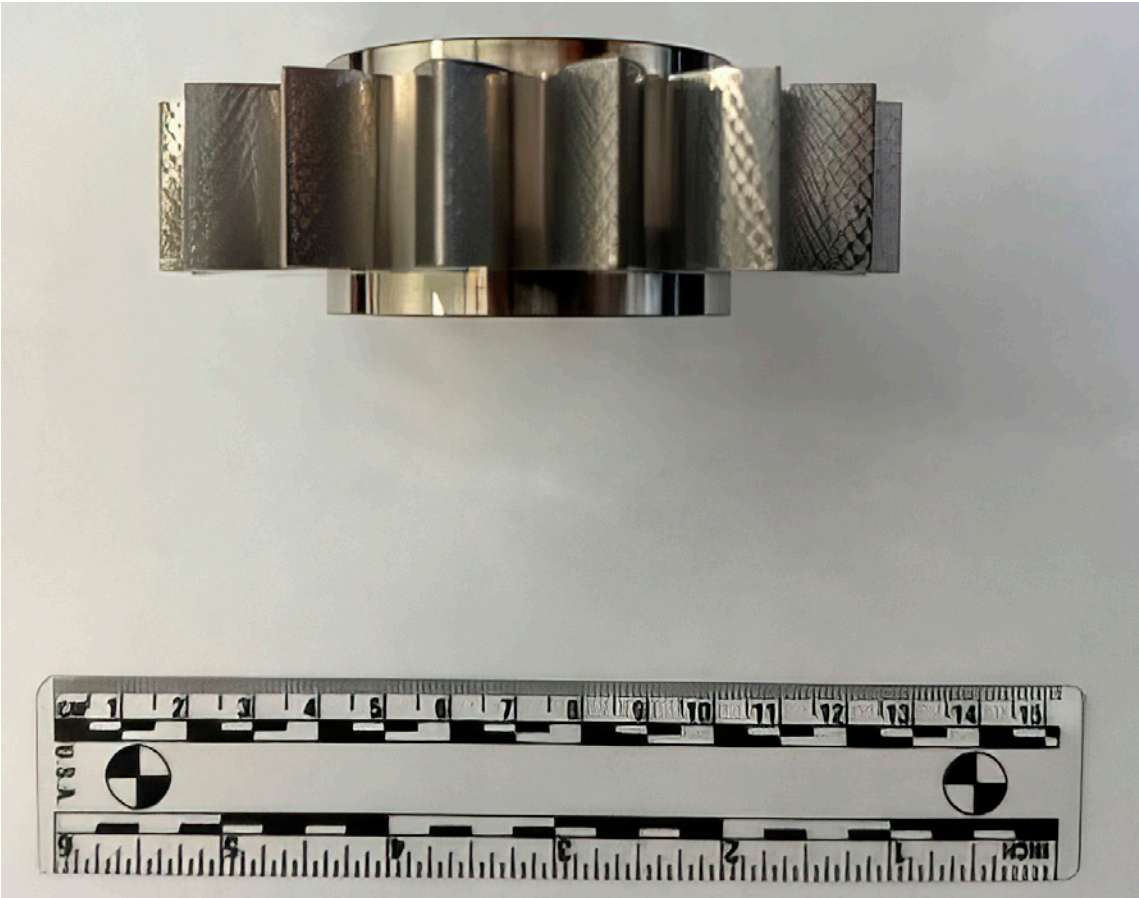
FZG test gear view of flanks showing the checked pattern used to highlight the appearance of surface scratches.
